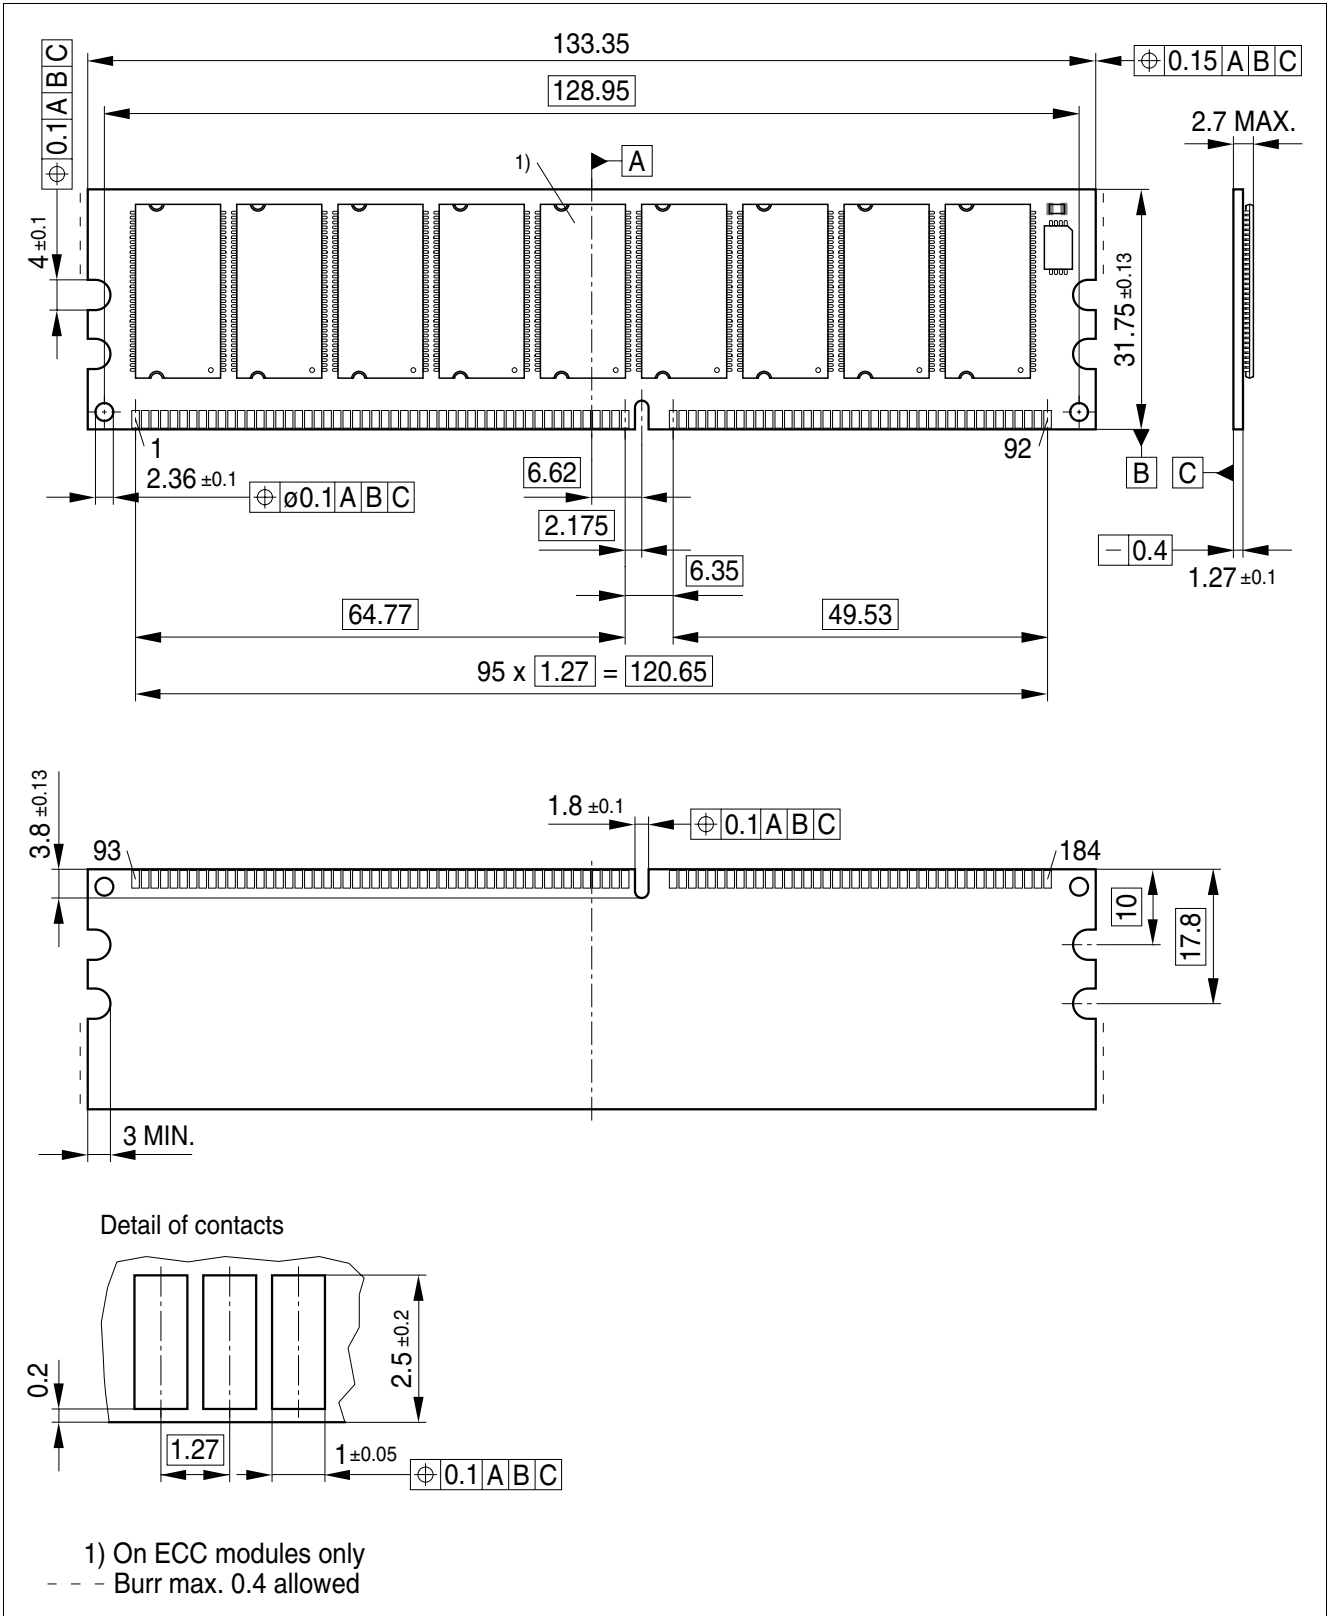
Package Outlines -Raw Card A1 (One Rank Modules)
